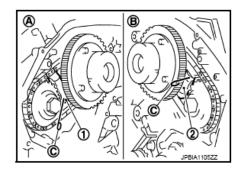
Identifying Stopper Pin On Timing Chain Tensioners (Bank 1 And 2) Courtesy of NISSAN MOTOR CO., U.S.A.
